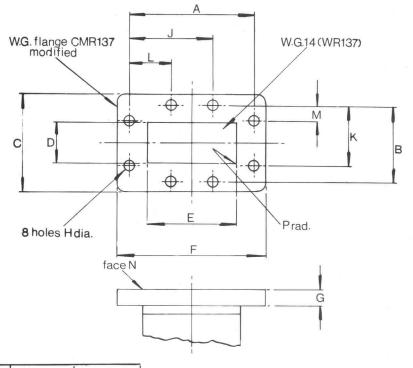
Outline of Flange 53/WGF/14/2 for WM112F Mount
